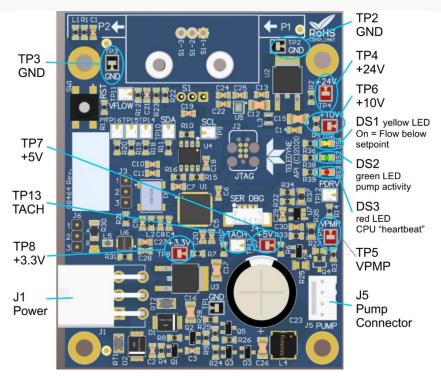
DC Pump Control Board – Test Points and Indicator LEDs
